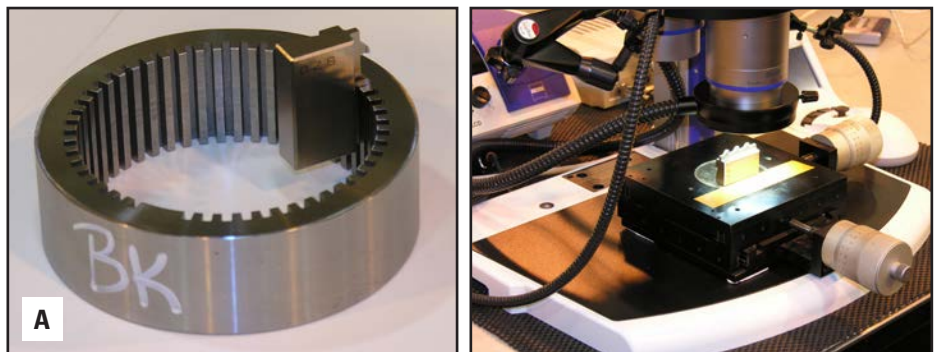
Shown: a) tested broach ring with broach tool resting in finished slot; b) a broach tool under microscopic examination for tool wear measurement.
